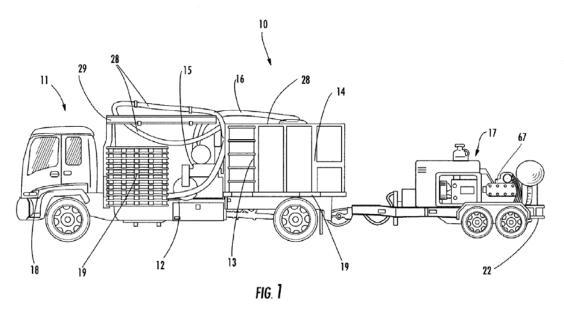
is a side view of stripe removal system 10 of the challenged patent. Ex. 1001, 3:21–22. Stripe removal system 10 includes truck 11 and trailer 17. *Id.* at 3:33–34. Truck 11 includes swinging boom 29, vacuum hose 28, vacuum pump 15, hose 16, sump 14, liquid reservoir 13, bed 12, ramp 19, and cab-over 18. *Id.* at 3:33–4:10. The vacuum tank is capable of
